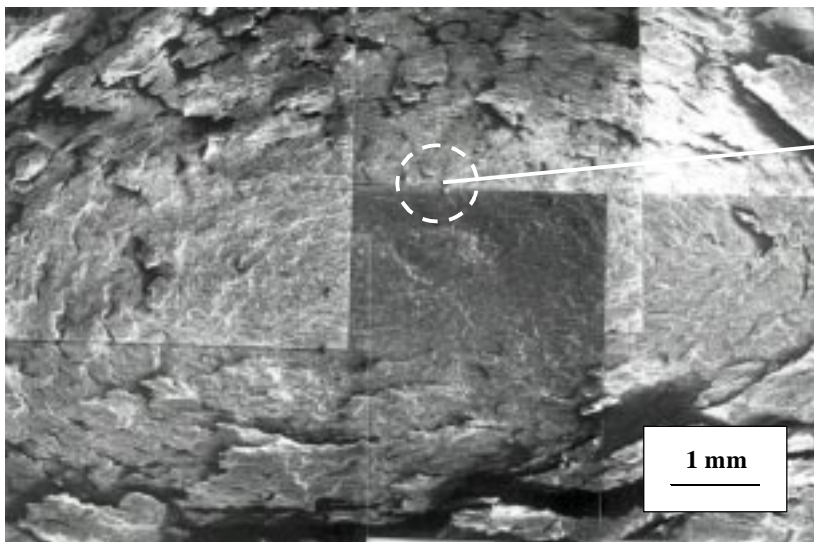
Another "Bean" Morphology of the Fracture Surface.
